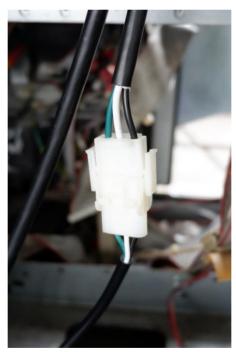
Connecting EK0124 to the PSU mounted on Plate assembly
